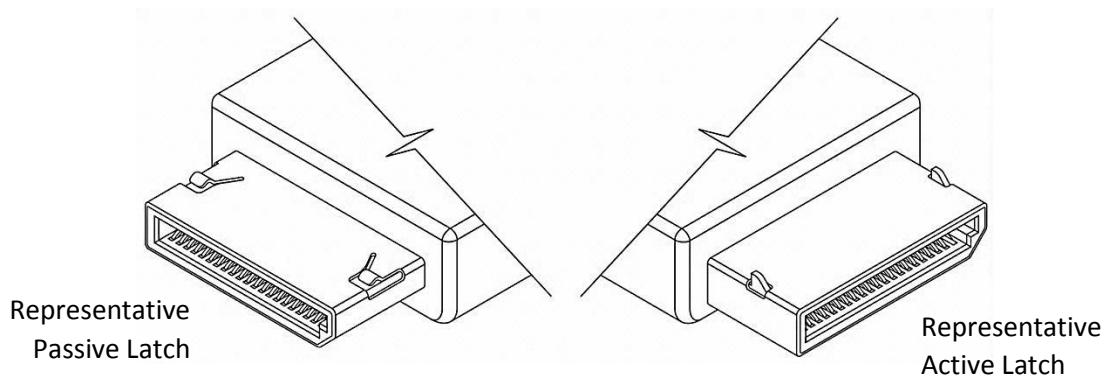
x4 Free Cable-side Connectors with Passive and Active Latches
